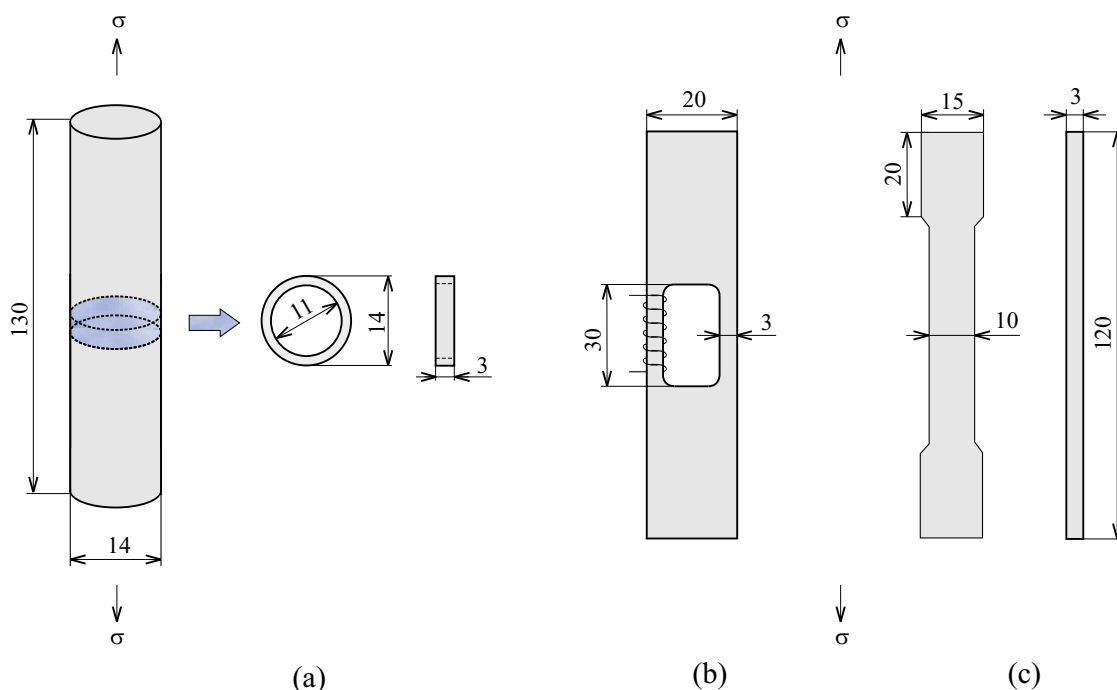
Used ring-shaped (a), window-shaped (b) and strip-shaped (c) samples (dimensions of the non-deformed specimens are pointed).
